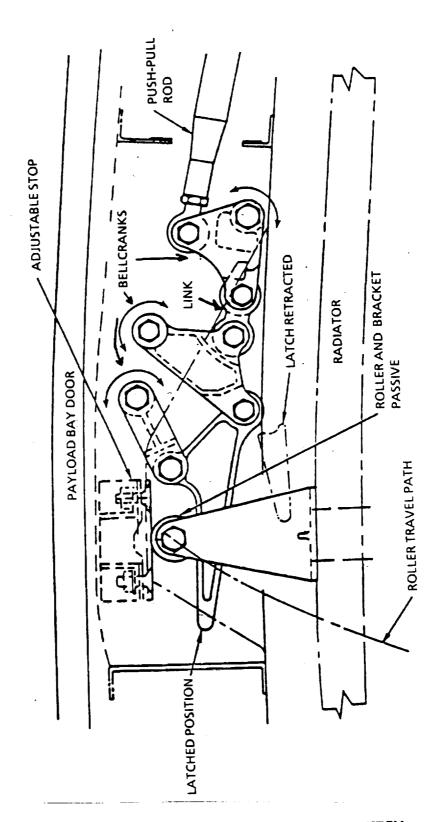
RADIATOR LATCH HOOK MECHANISM
